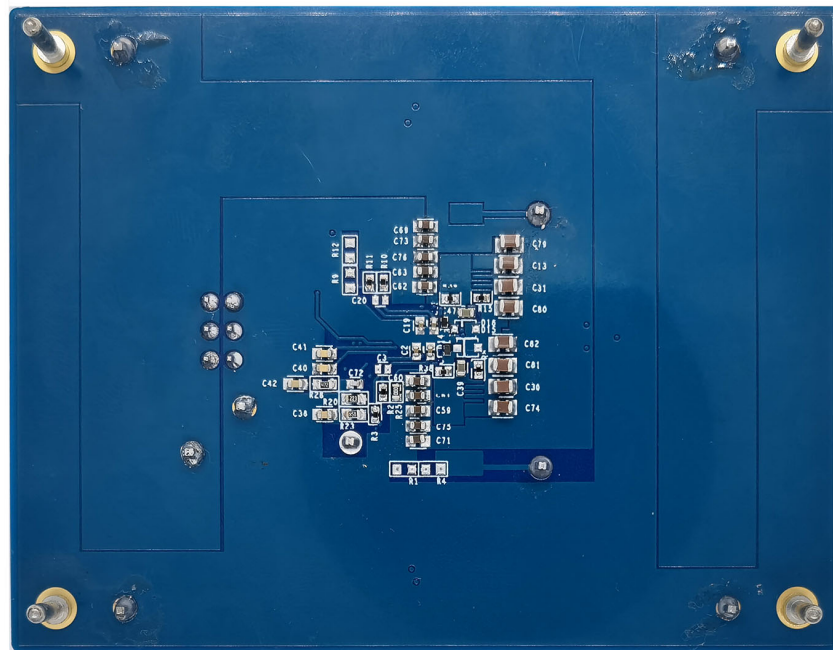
ISL81807EVAL1Z Evaluation Board, Bottom View
